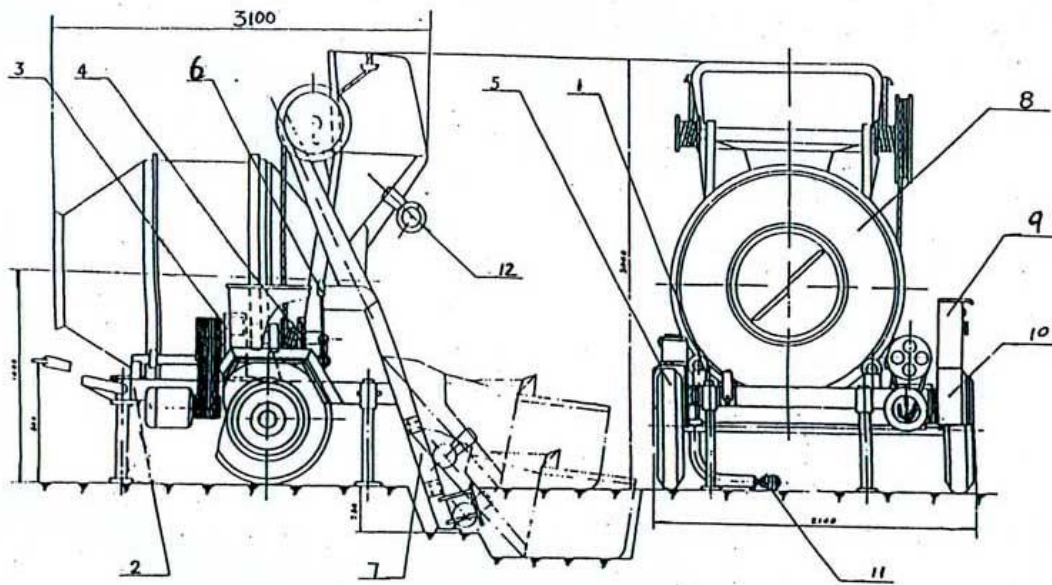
VIEW OF REVERSE CONCRETE MIXER
